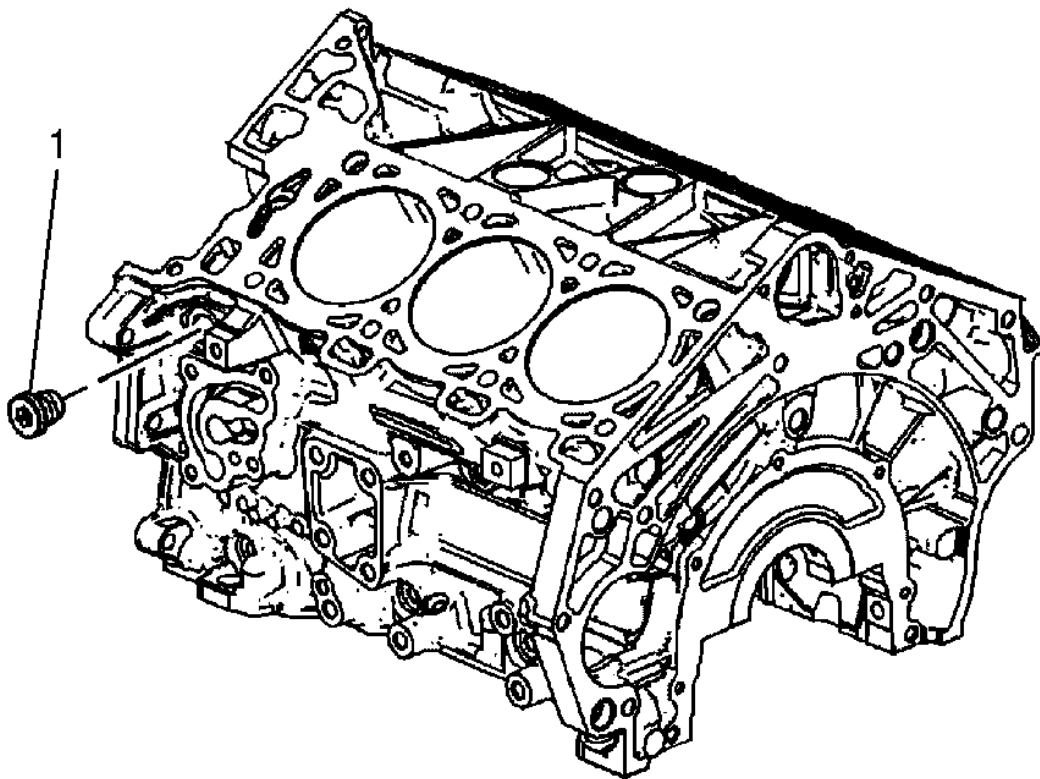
Identifying M14 Rear Oil Gallery Threaded Plug
